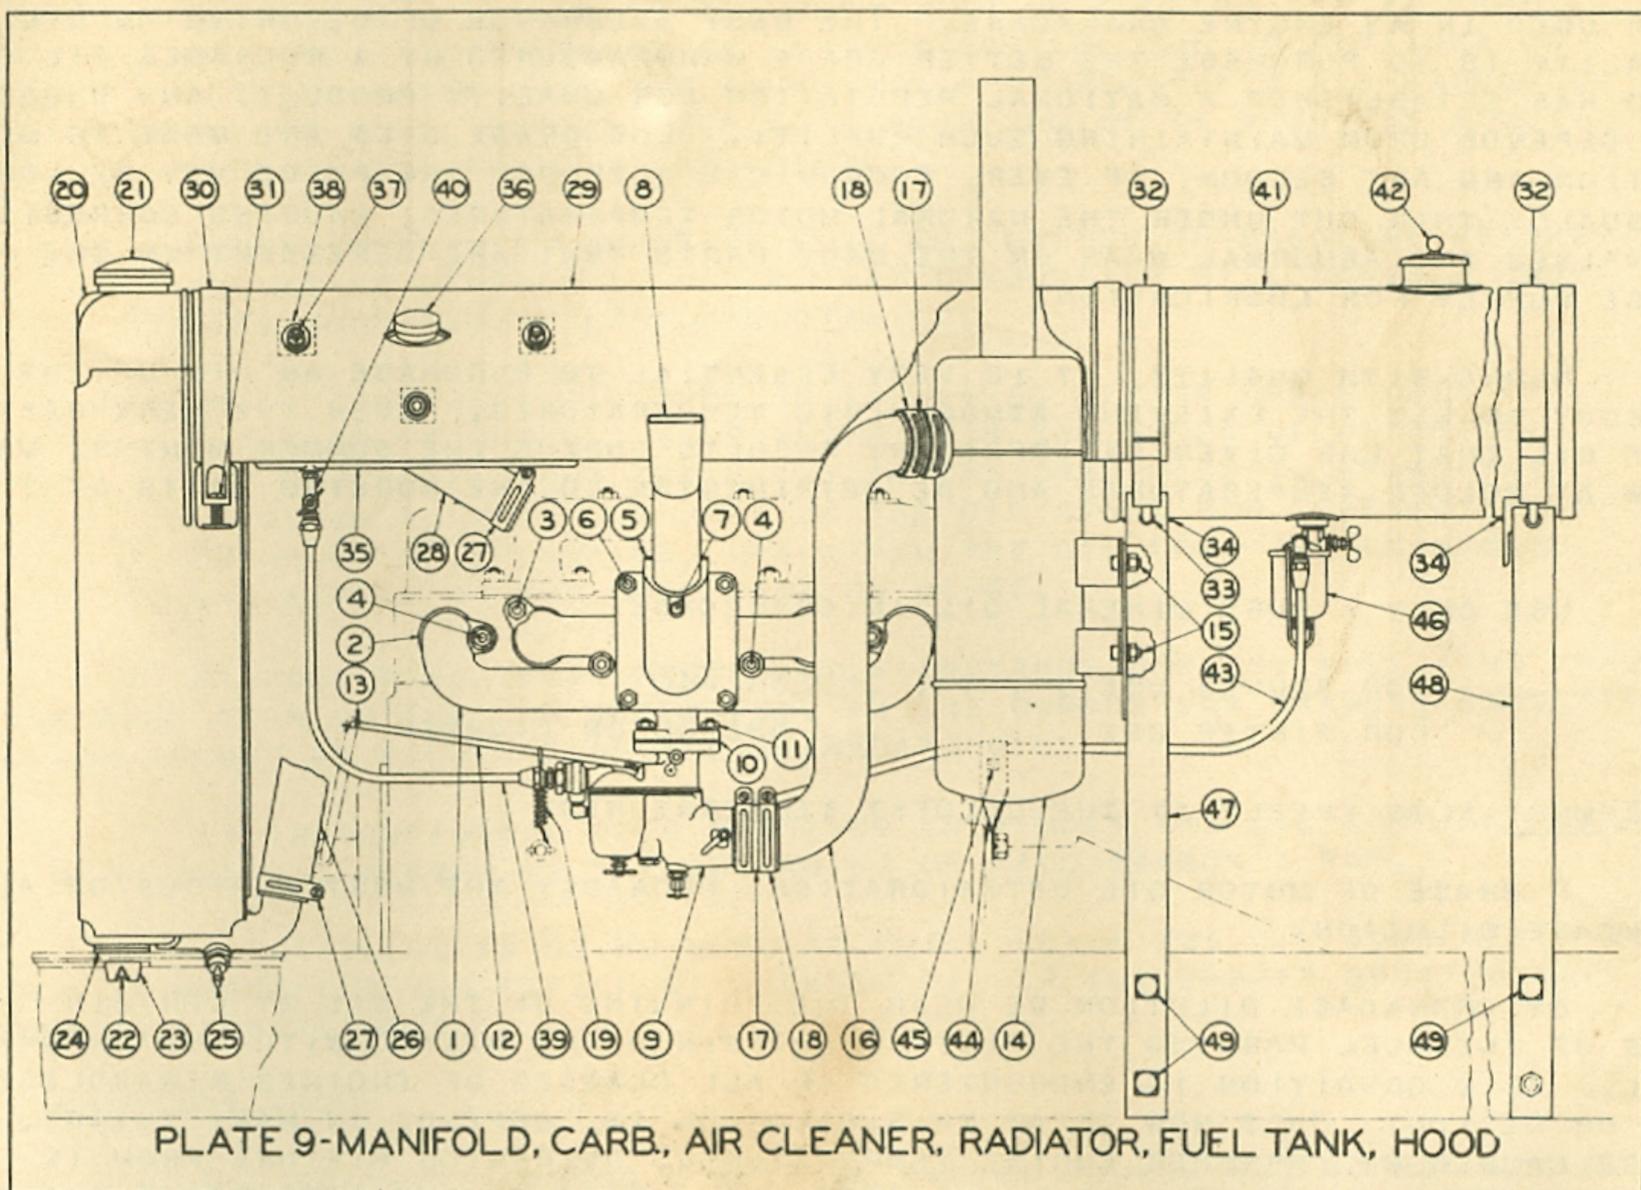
MANIFOLD, CARB, AIR CLEANER, RADIATOR, FUEL TANK, HOOD
